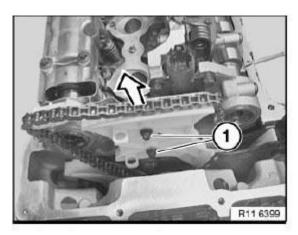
Securing Special Tool 11 4 283 To Cylinder Head With Bolts Courtesy of BMW OF NORTH AMERICA, INC.
